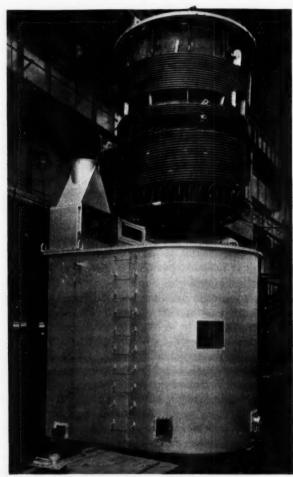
The Lynn mercury boiler showing firebox, convection tubes, liquid heater and steam superheater before lowering into casing; outlet of air heater at upper left
